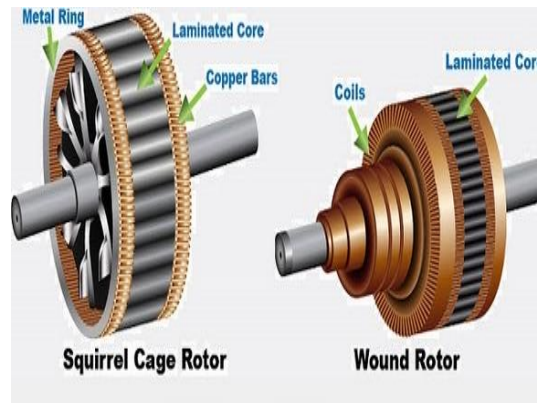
Squirrel Cage Rotor Vs Wound Rotor
